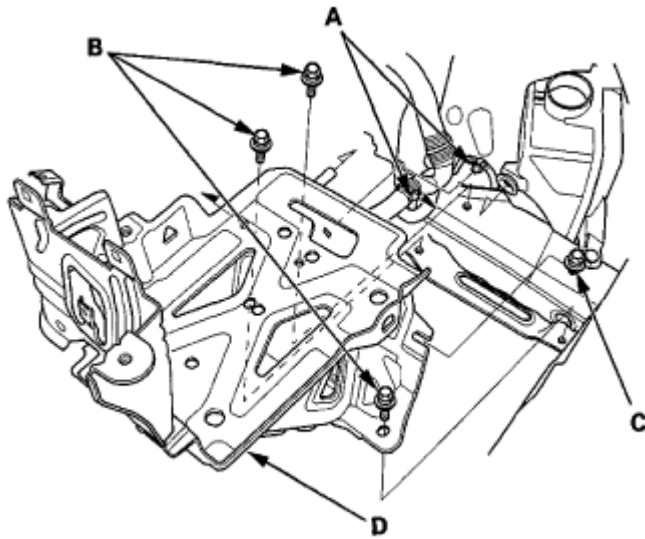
Identifying Harness Clamps And Battery Base With Mounting Bolts
